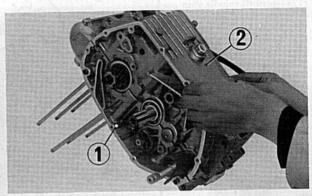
(1) Upper crankcase (2) Lower crankcase
